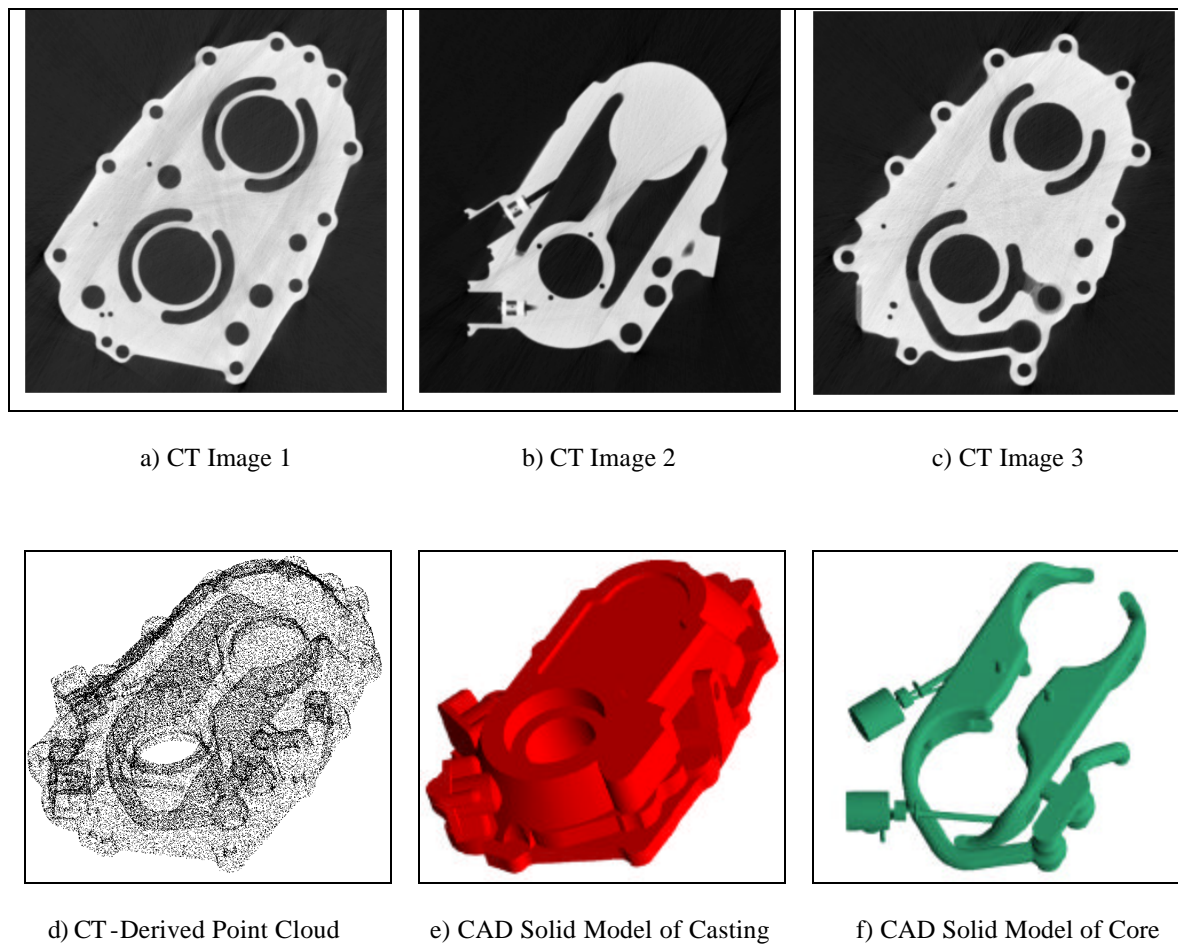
CT-Assisted Reverse Engineering of a Gearbox Cover Sand Casting
